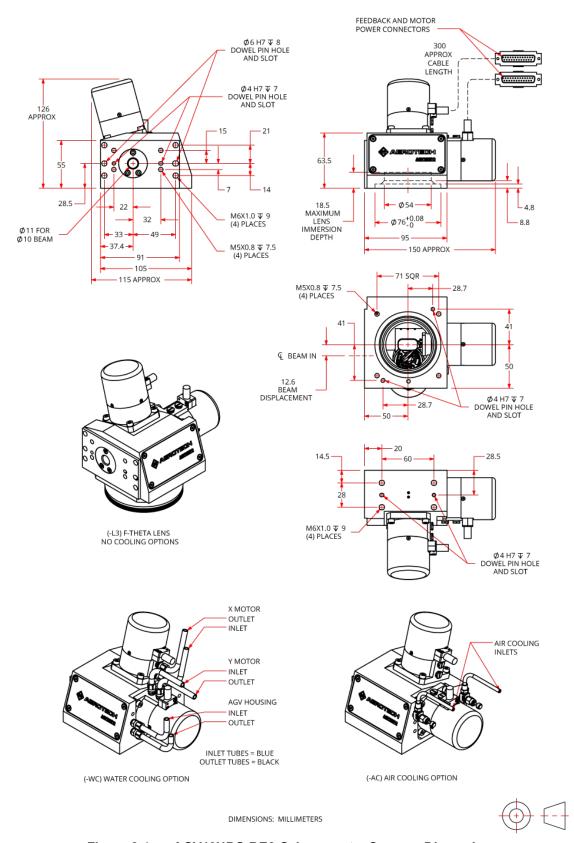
AGV10HPO-BE2 Galvanometer Scanner Dimensions
